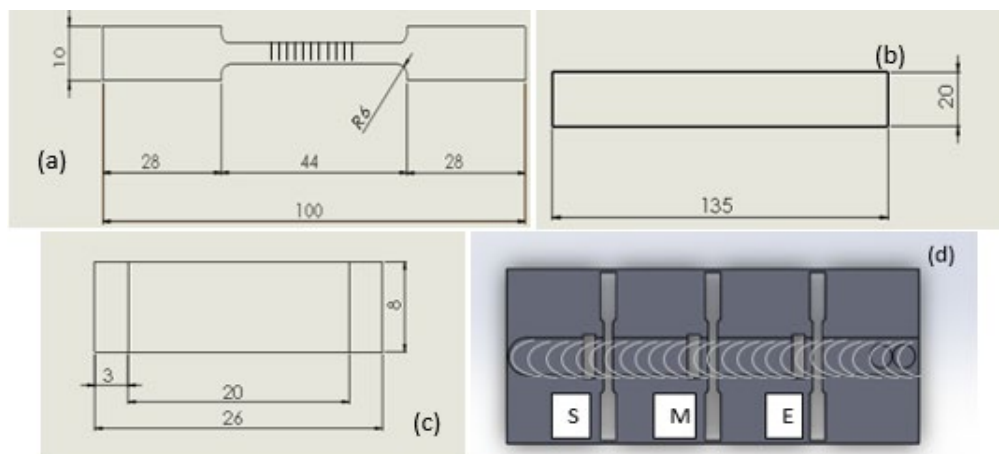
(a) Tensile test specimen, (b) Bending specimen, (c) Microhardness specimen (all the dimensions are in mm), (d) Specimen positions on FSPed sampled plate.
